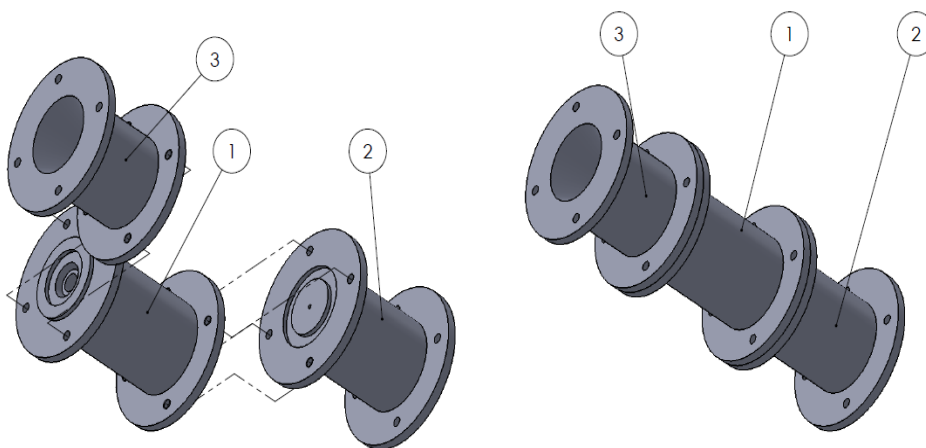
(Shows a 2D Assembled and Exploded View Drawing of The Supersonic Nozzles Separator System)
